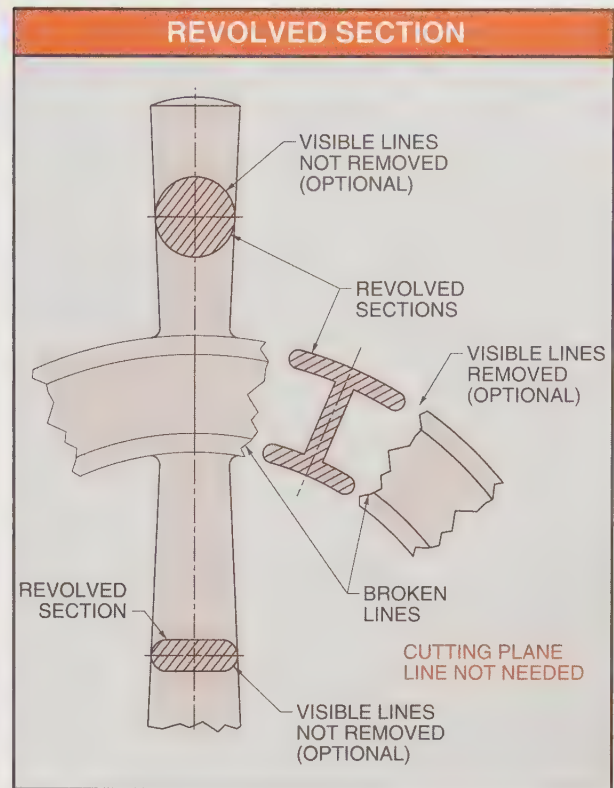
A revolved section is a sectional view that shows the cross sectional shape of elongated parts.
